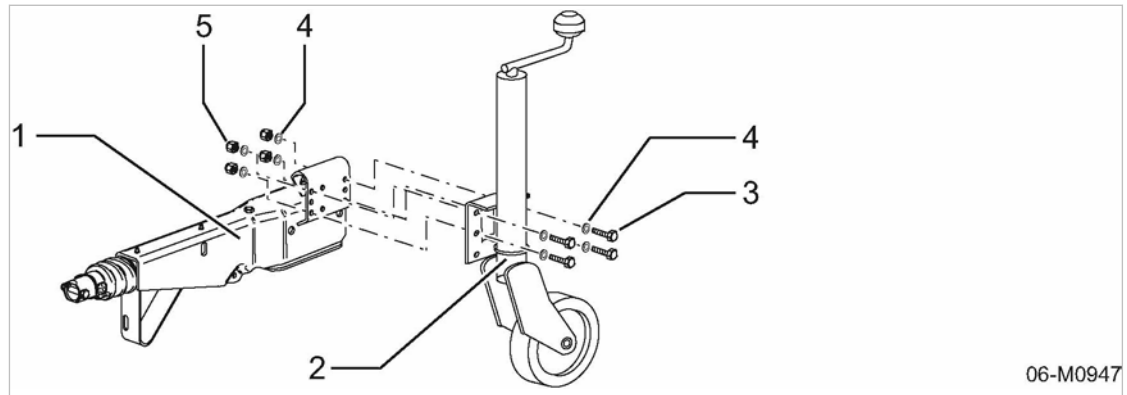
Fitting the jockey wheel of the non-adjustable tow bar
